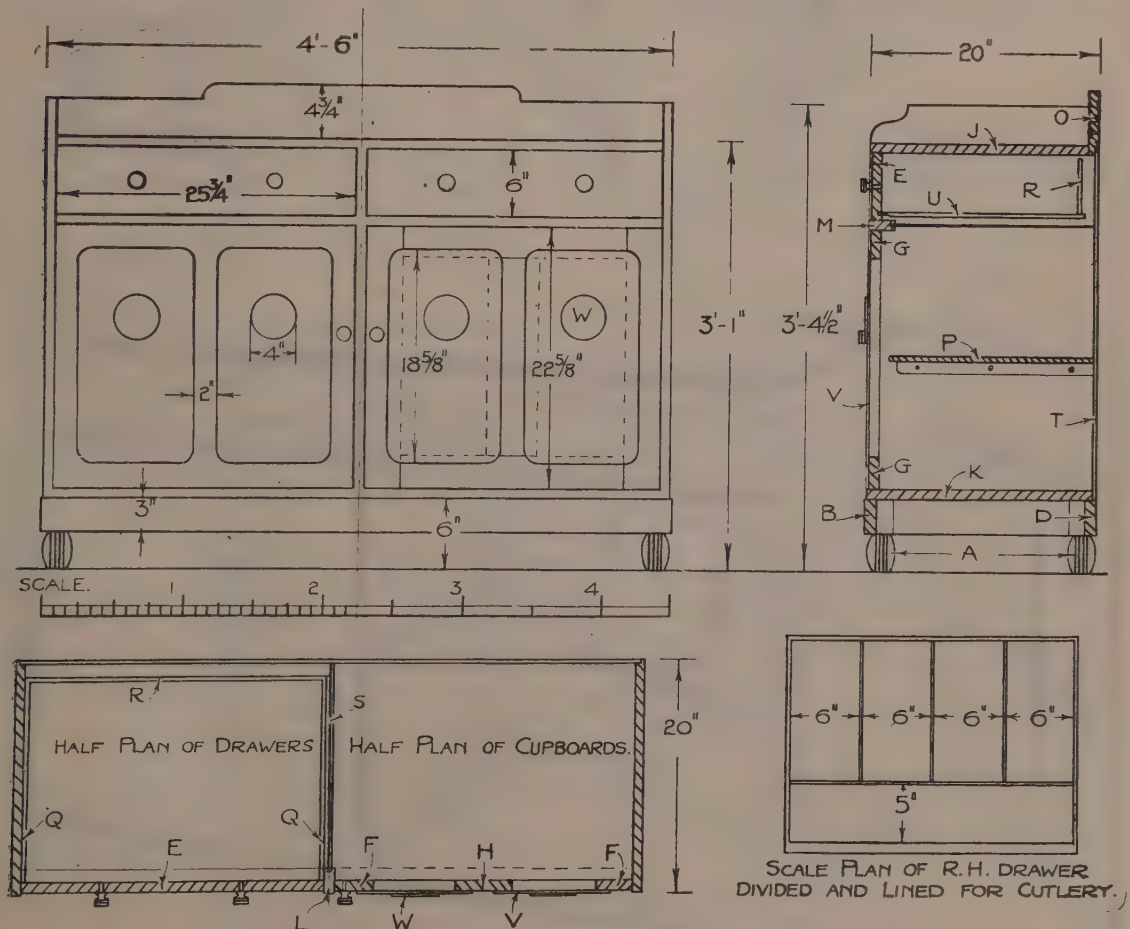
SCALE ELEVATION, SECTION, PLAN, ETC., OF 4 FT. 6 IN. SIDEBORD.
